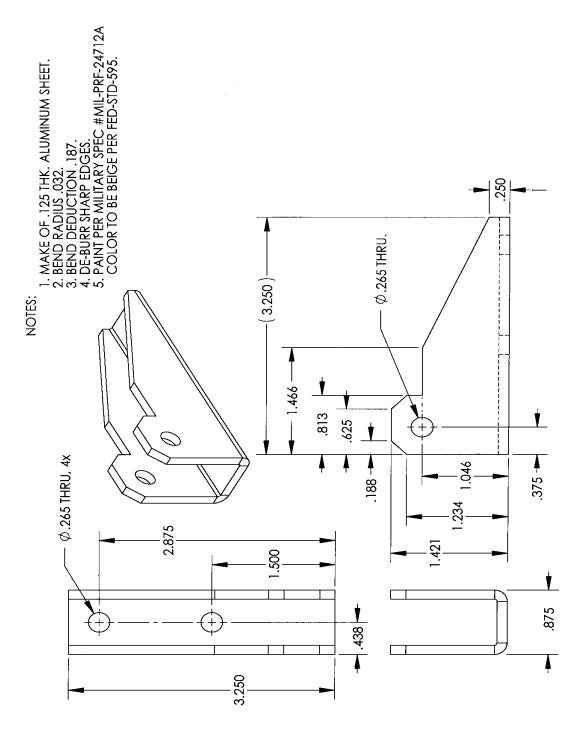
SPRING BRACKET DOUBLER PLATE INSTALLATION
